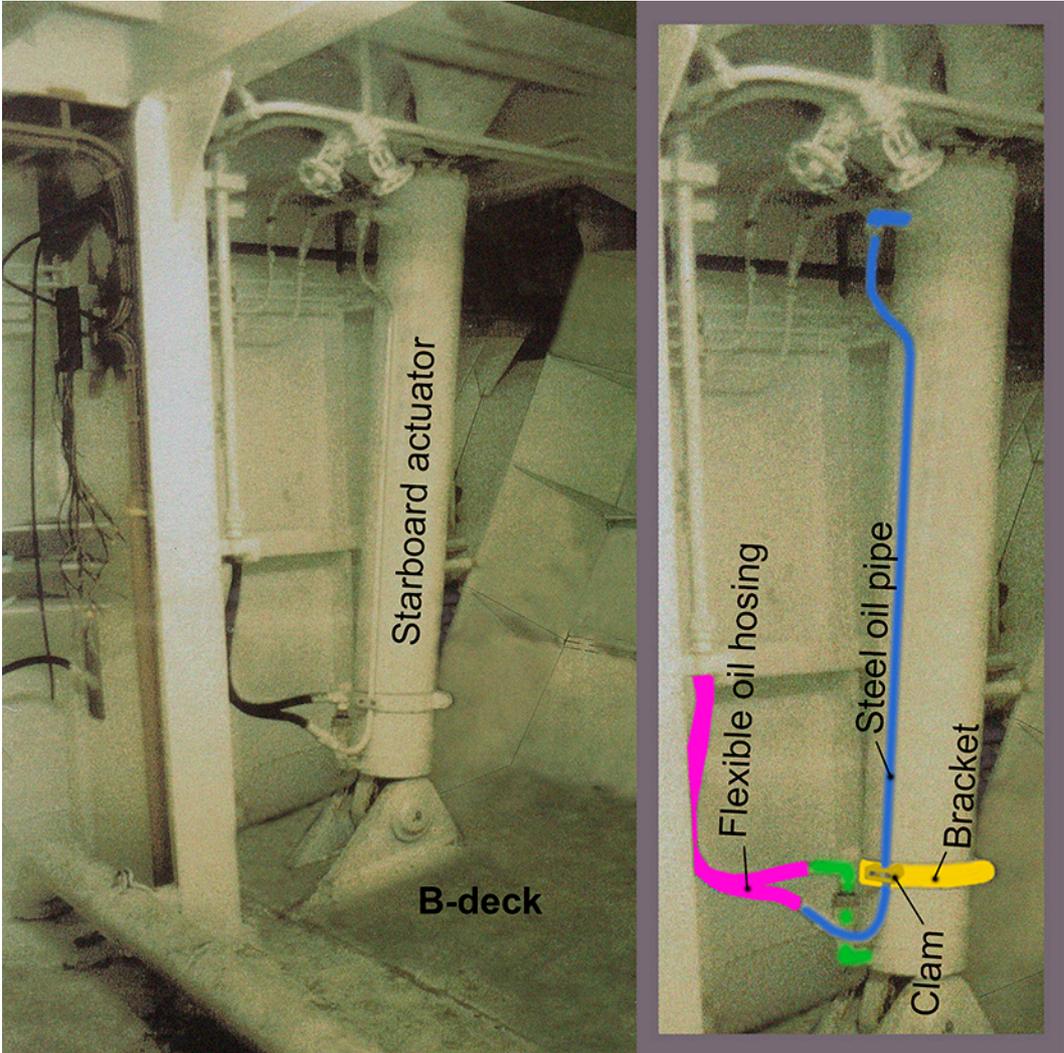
The approximate installation of the oil pressure hoses, pipes and the bracket for the steel pipe.
